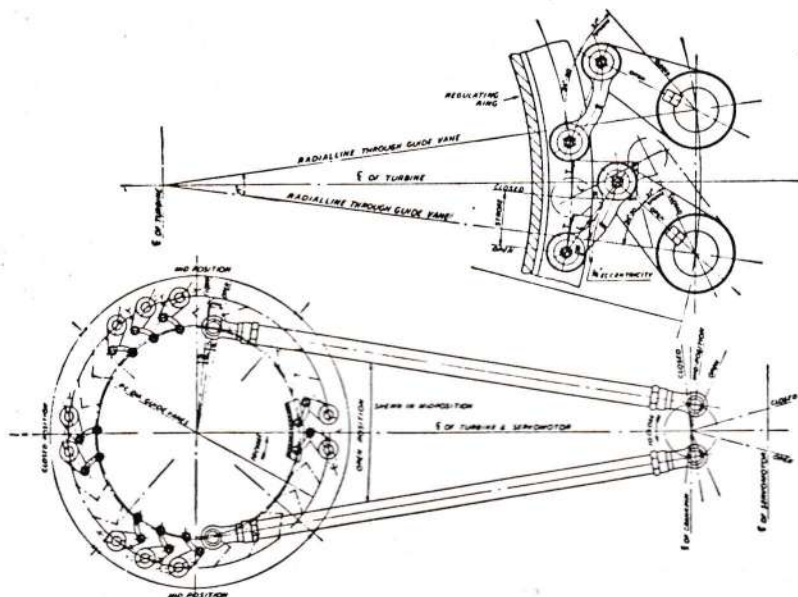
Linkage between regulating shaft and guide vanes
